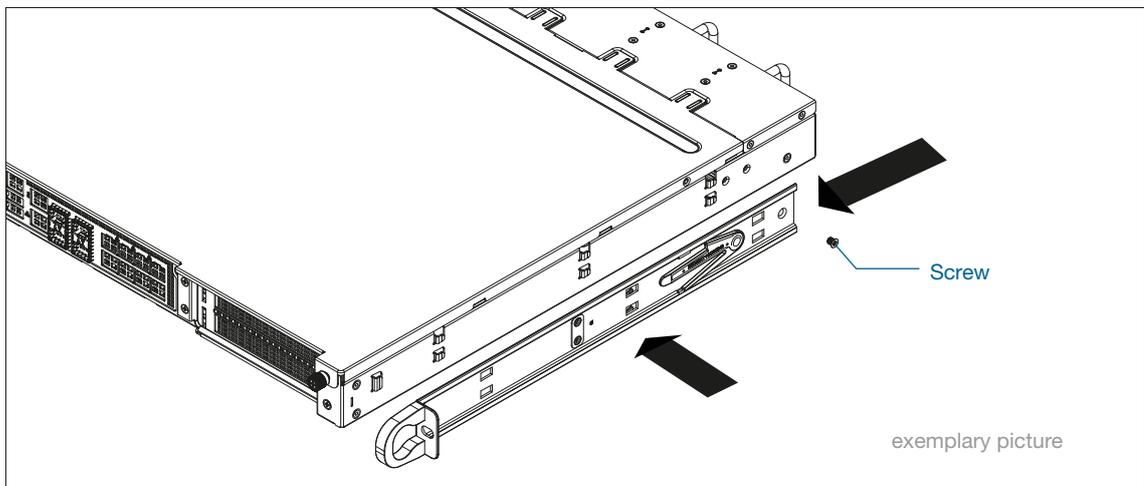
Installing the Inner rail (Right side Inner rail shown)
